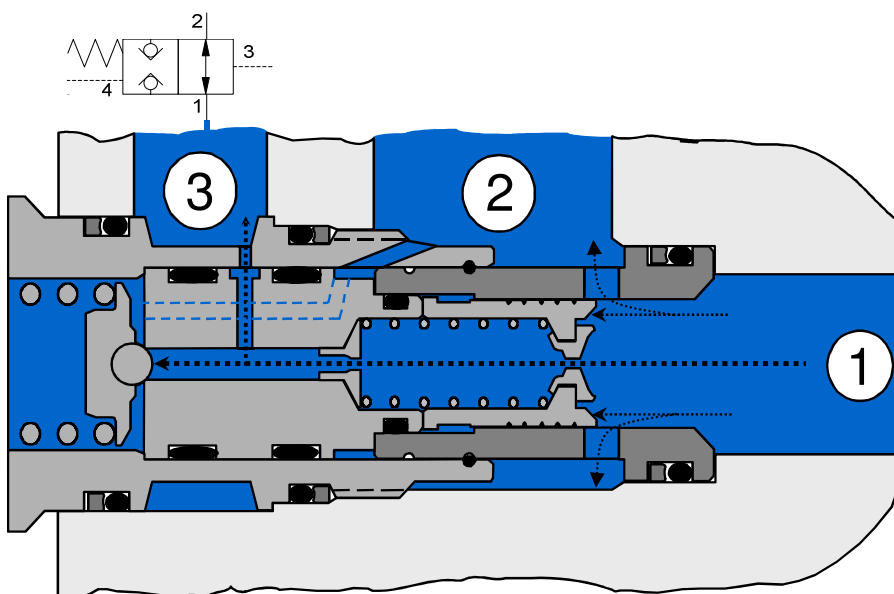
Cross section view of the RVIA-LCN with the pilot-to-open valve in open position
